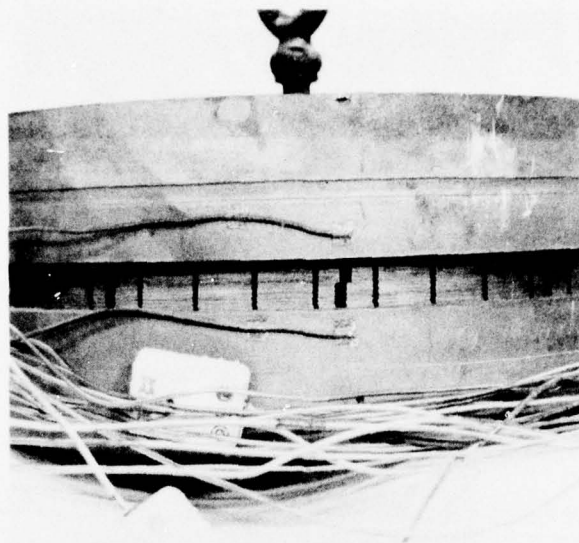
The Large Stack Laminated Wheel Blank, and the Waspaloy End Plates on the Bonding Fixture.
